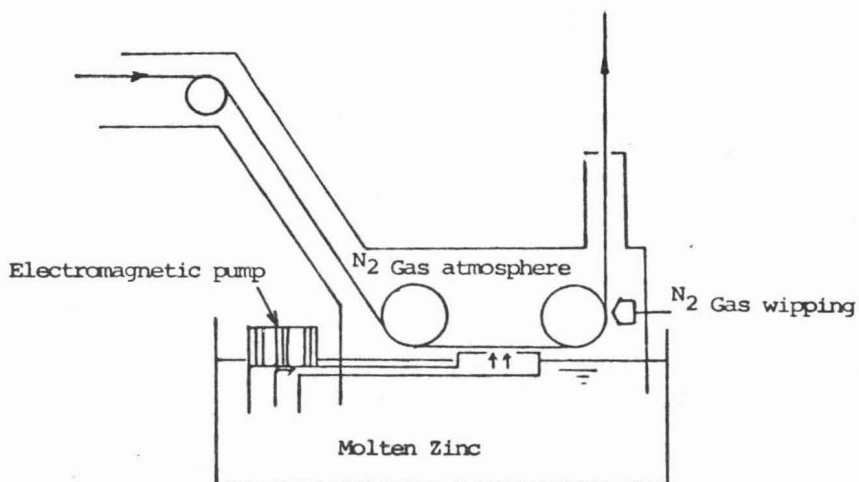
Equipment outline of electromagnetic pump type one-side hot dip galvanizing process
